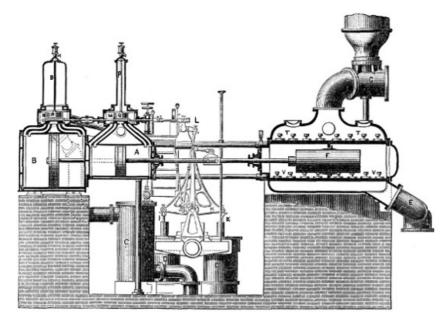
The Worthington Pumping-Engine, 1876. Section.
